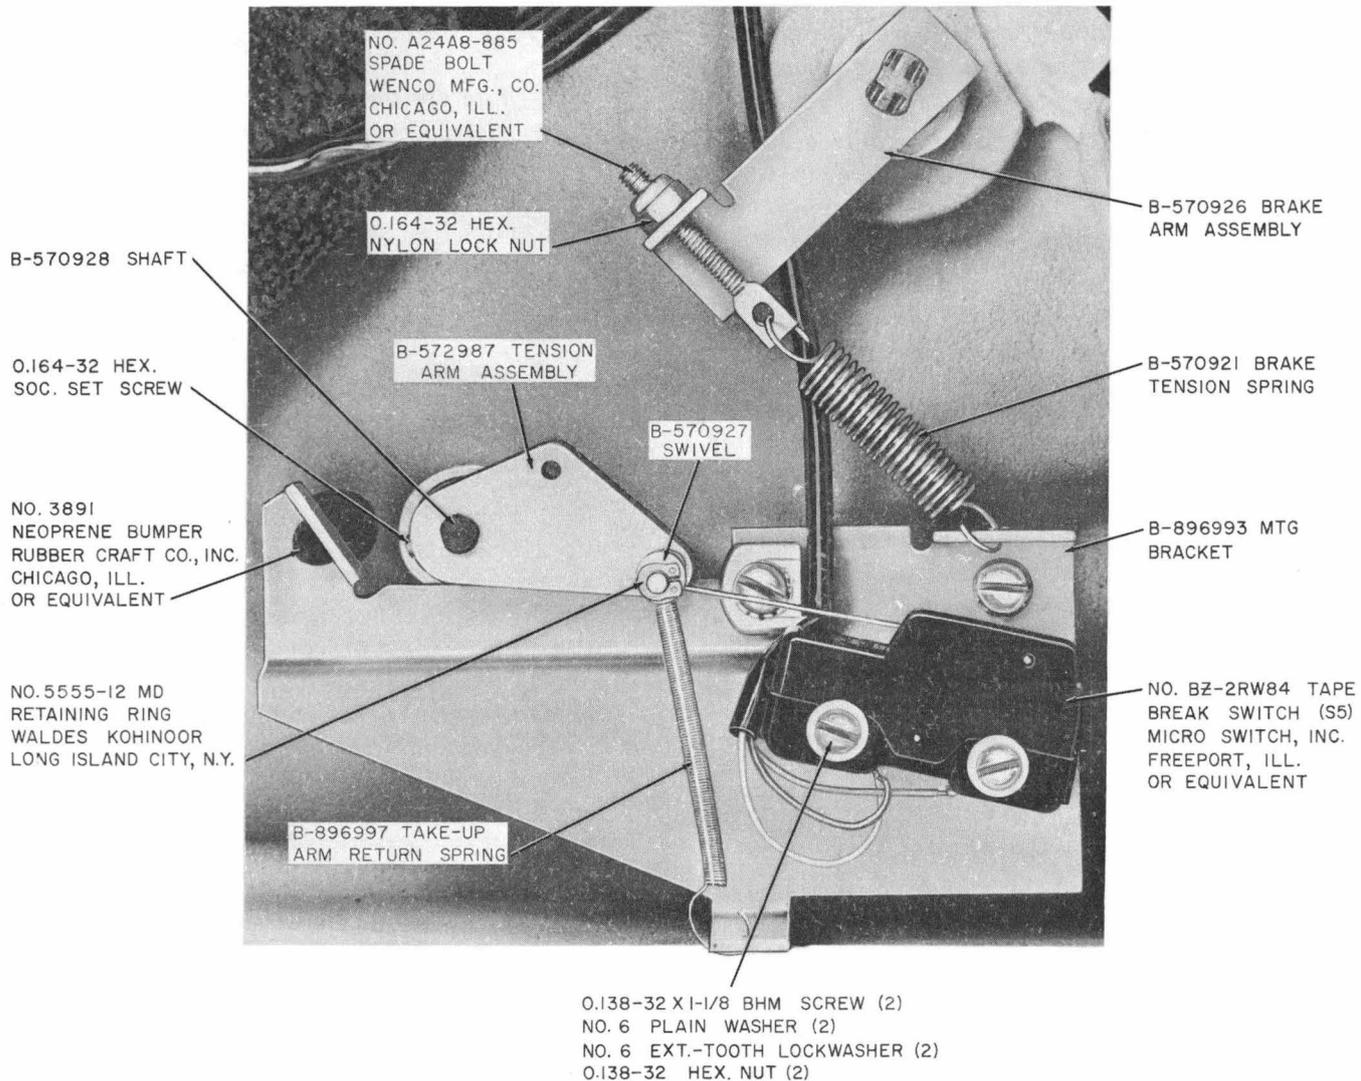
Sectional View of Supply or Take-Up Reel Brake Assembly — KS-19125, List 2 Recorder
